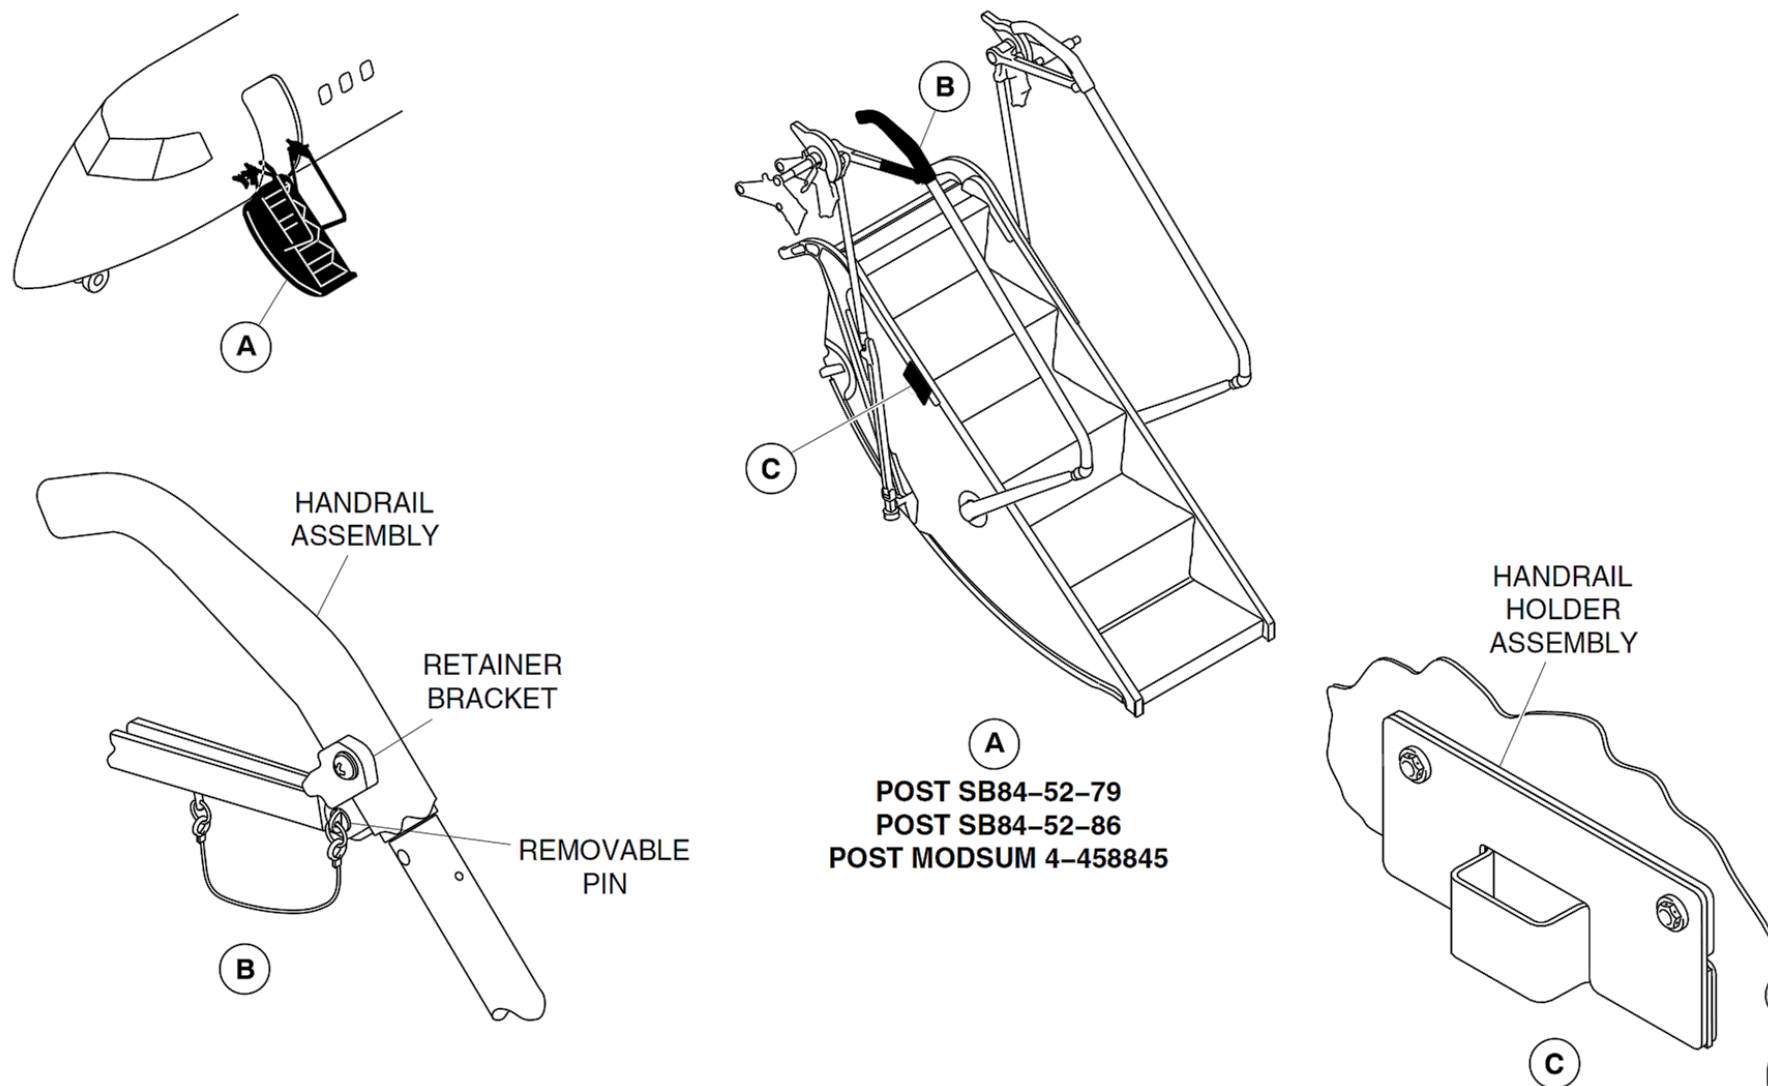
Airstair Door with Jetway – Folding Handrail Detailed 2 of 2
